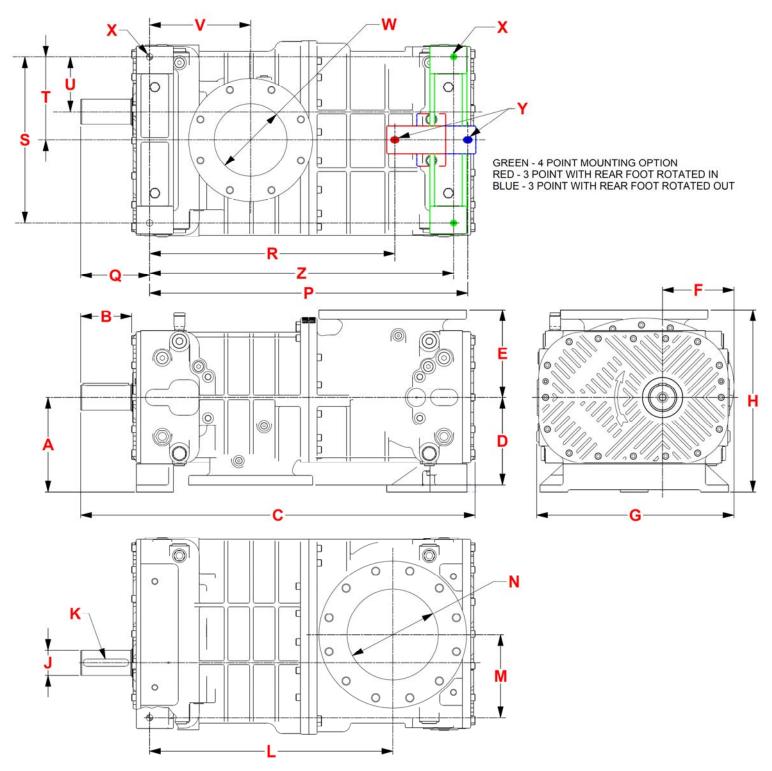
BOTTOM DISCHARGE OUTLINE DIMENSIONS
